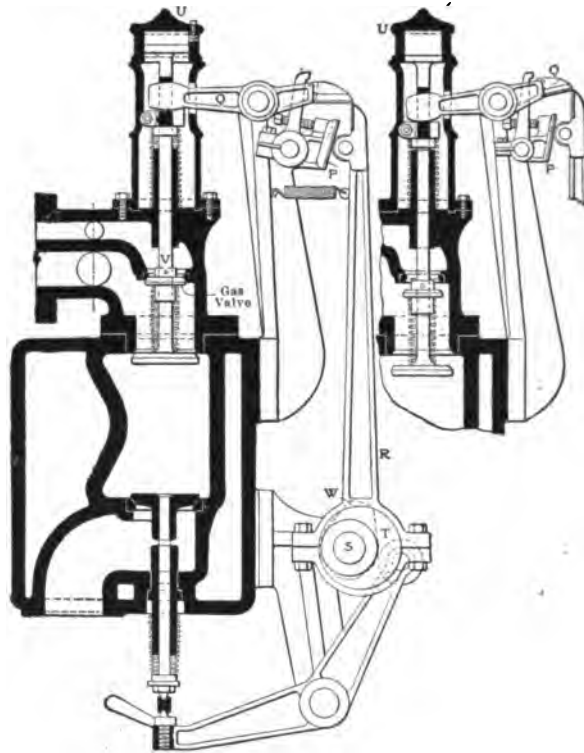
Valve Gear, Jacobson Automatic Cut-off Engine.
